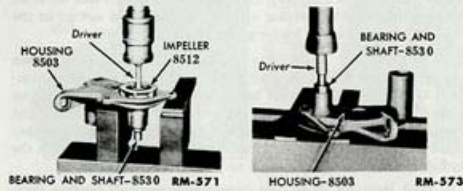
Pressing Water Pump Impeller Off Shaft (Ball Bearing Type)
